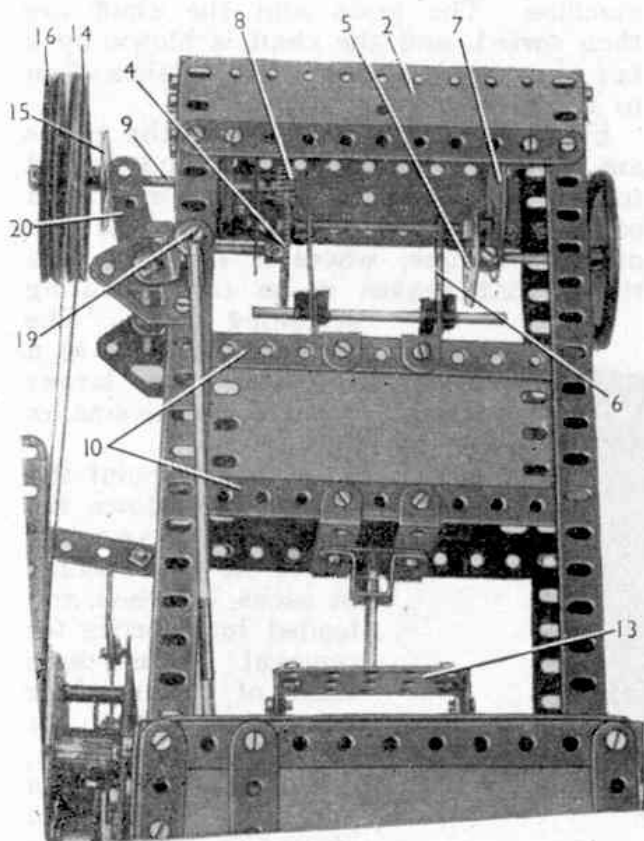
The Power Press seen from the rear, showing the geared crank arrangement for operating the ram.
